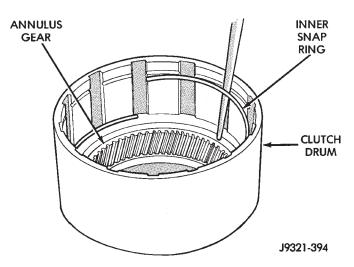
Clutch Drum Inner Retaining Ring Installation
